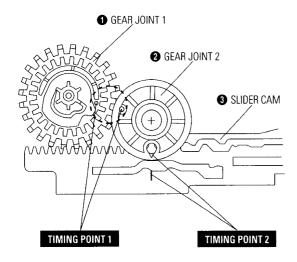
Bracket Gear, Gear FL Cam, Gear Joint 1, 2 Removal
